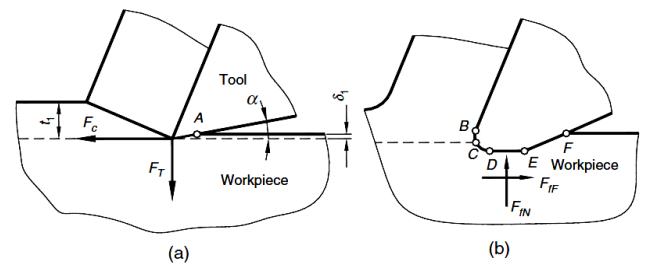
Contact of the tool flank with the workpiece: (a) ideally sharp tool as assumed in modeling and (b) real contact with the tool–workpiece interface [1].
